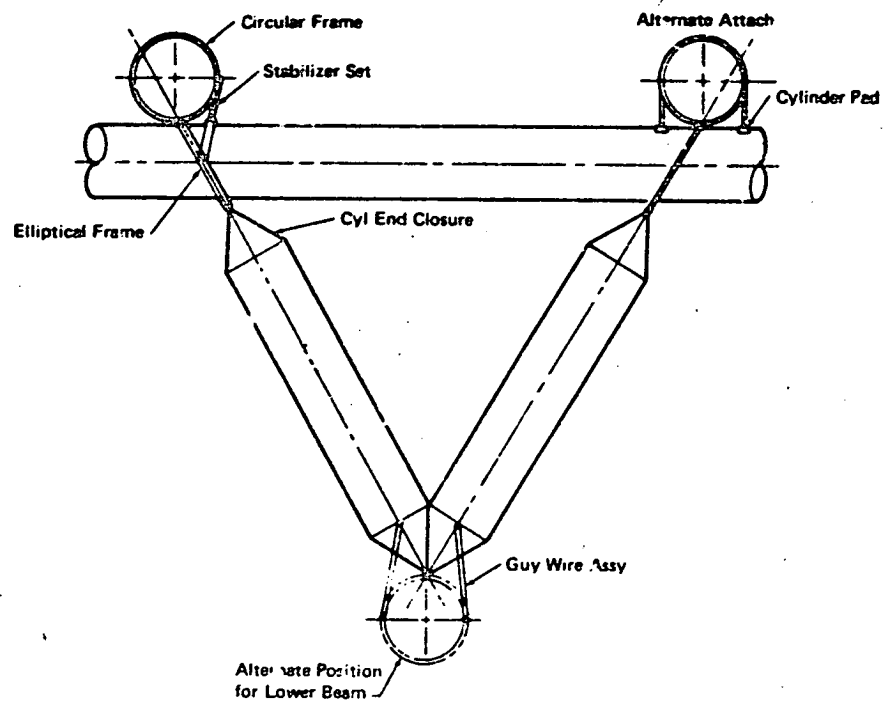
Payload Station Configuration – Externally Located Longitudinal Beams
